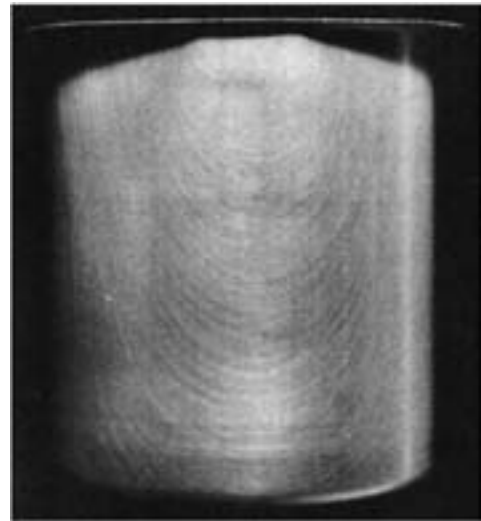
Deep drawn aluminum sheet showing looper lines (roping)⁵⁵⁾.
